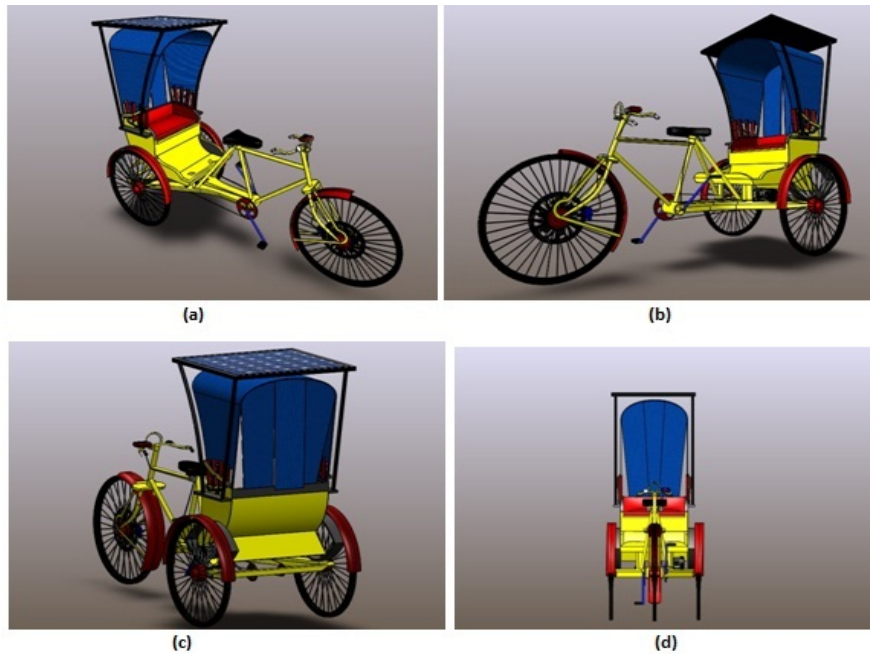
(a) Isometric view (Right), (b) Isometric view (Left), (c) Isometric (Back), (d) Front view
